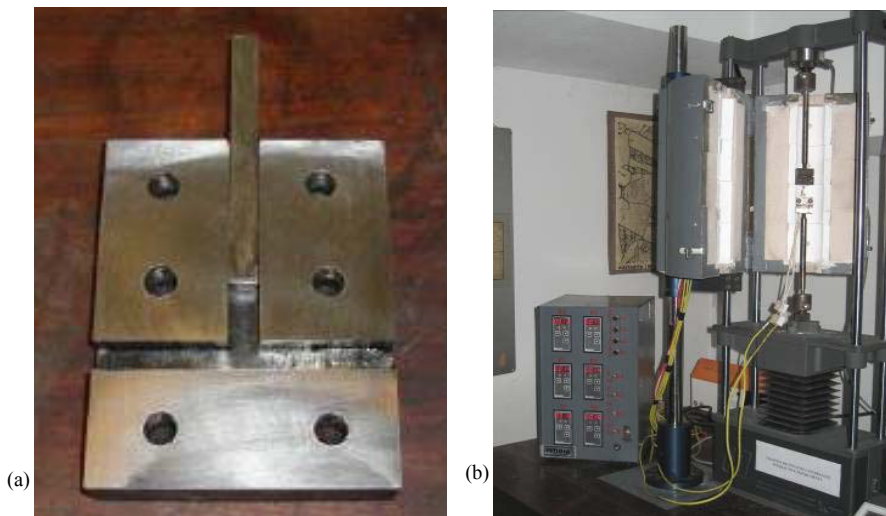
(a) ECAP T-die; (b) hot tensile test machine.
